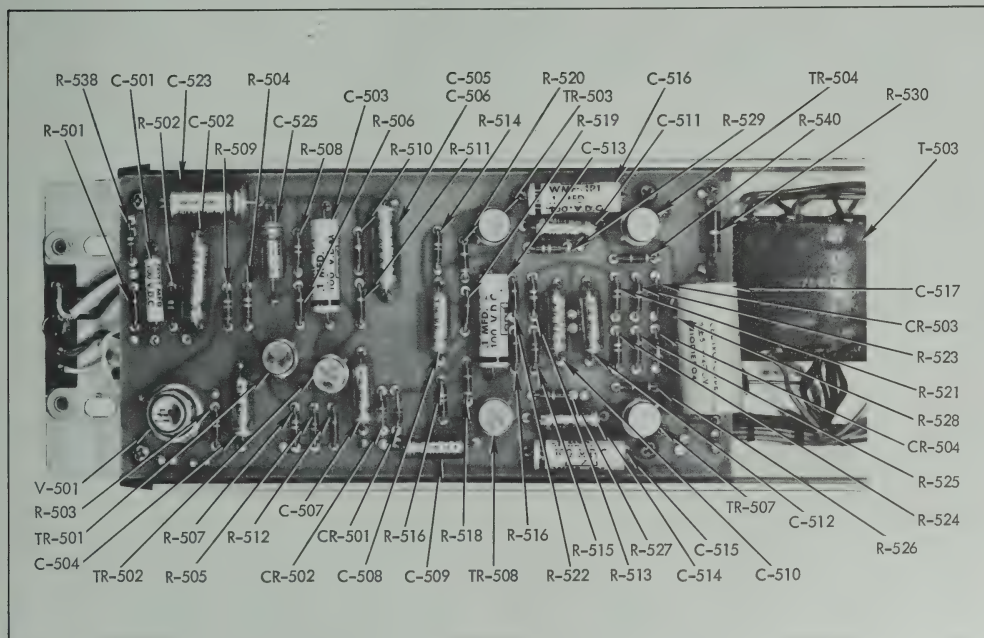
Y₂ PRINTED CIRCUIT BOARD
